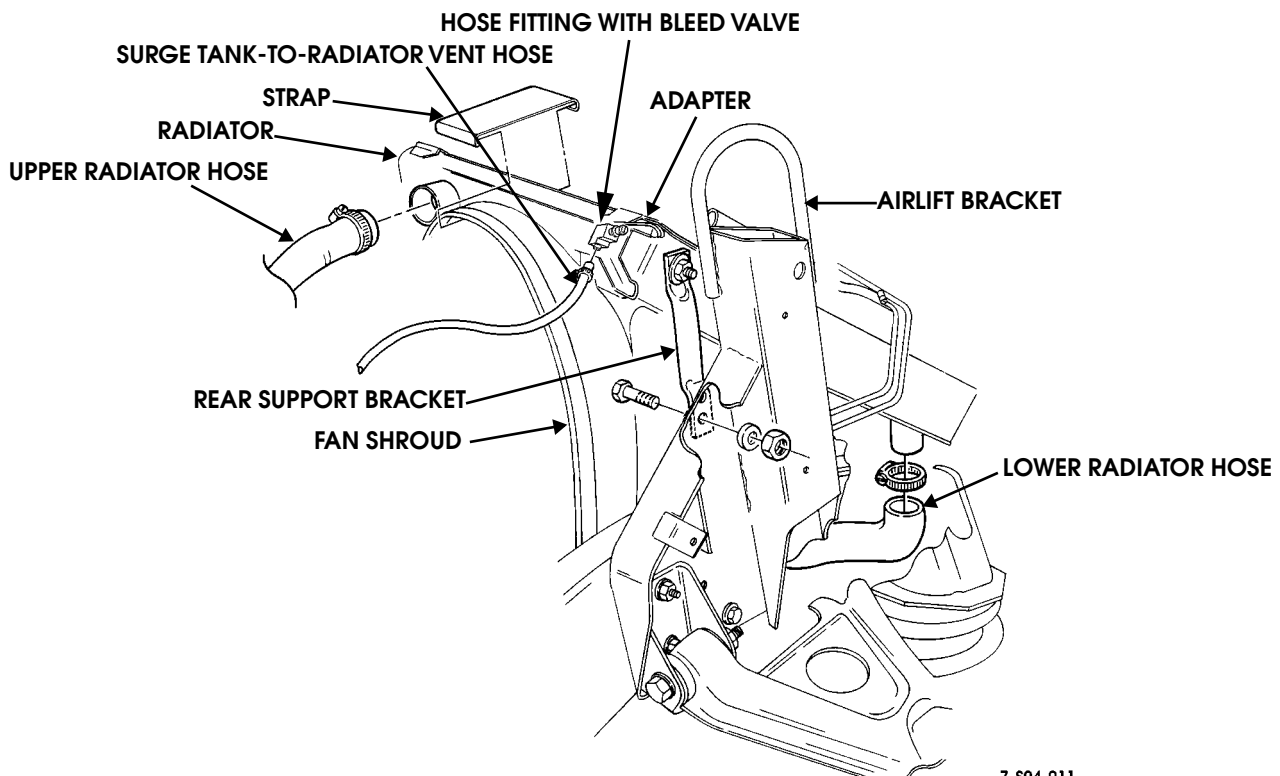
Radiator and Fan Shroud Assembly Mounting
